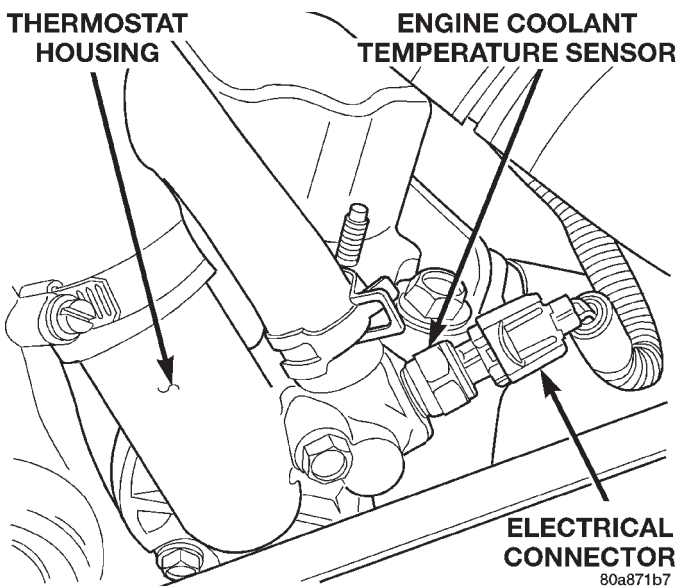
Engine Coolant Temperature Sensor—4.0L Engine
